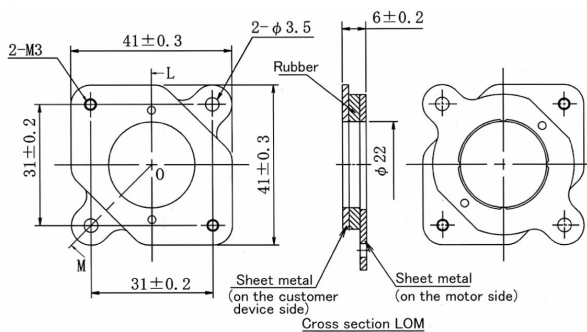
External Dimensions of the Damper (for 42sq. mm)
